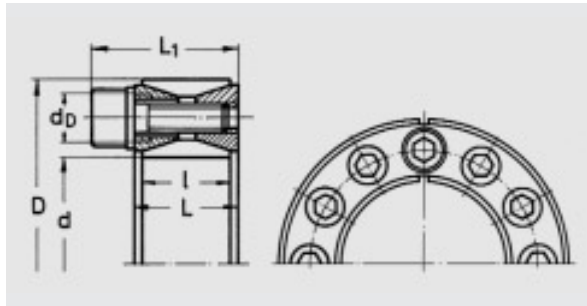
· Locking Assembly RINGFEDER® RfN 7012
